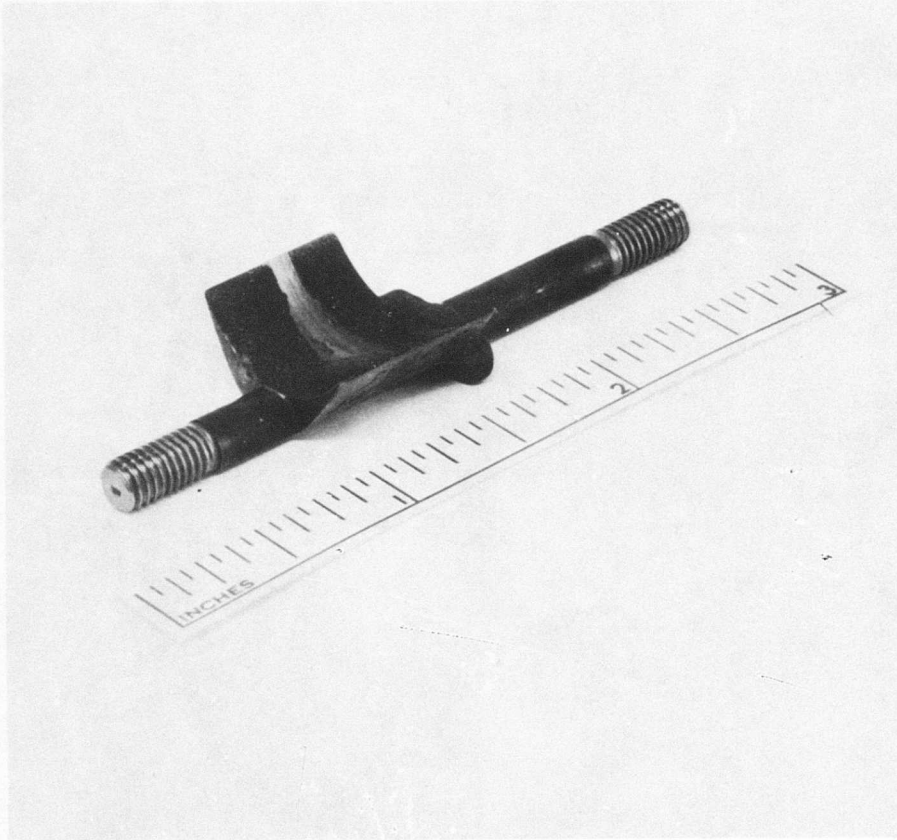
Overall View of Long Shank Rotor Blade Following Run Number 18 of Buildup F.
